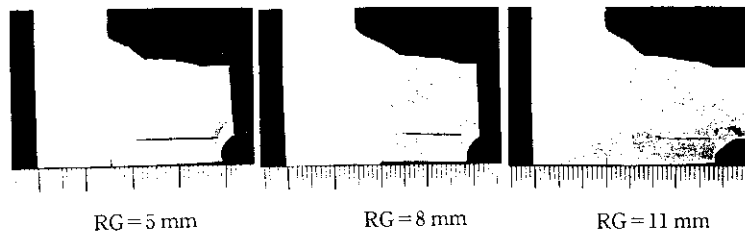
Examples of macroetch specimen of robot-welding
